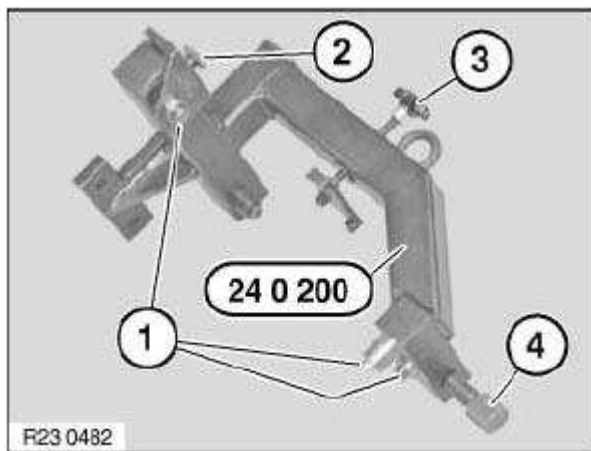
Adapters, Thrust Piece Spindle And Special Tool (24 0 200)
